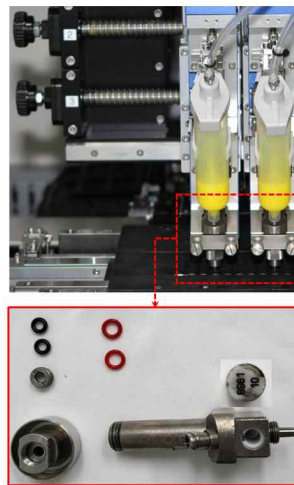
Exploded Pictures of the Precision Dispensing Pump
